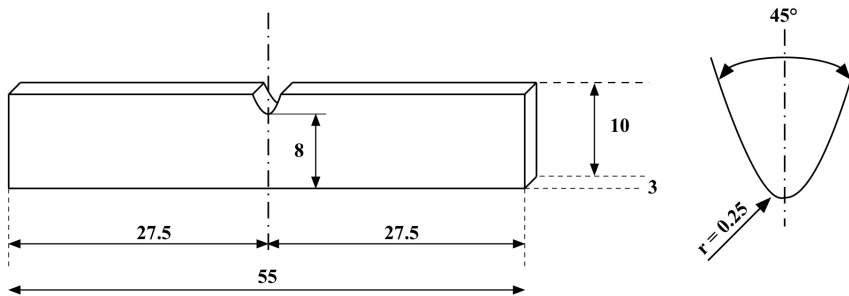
Dimensions of the Charpy-V test specimen (in mm).
